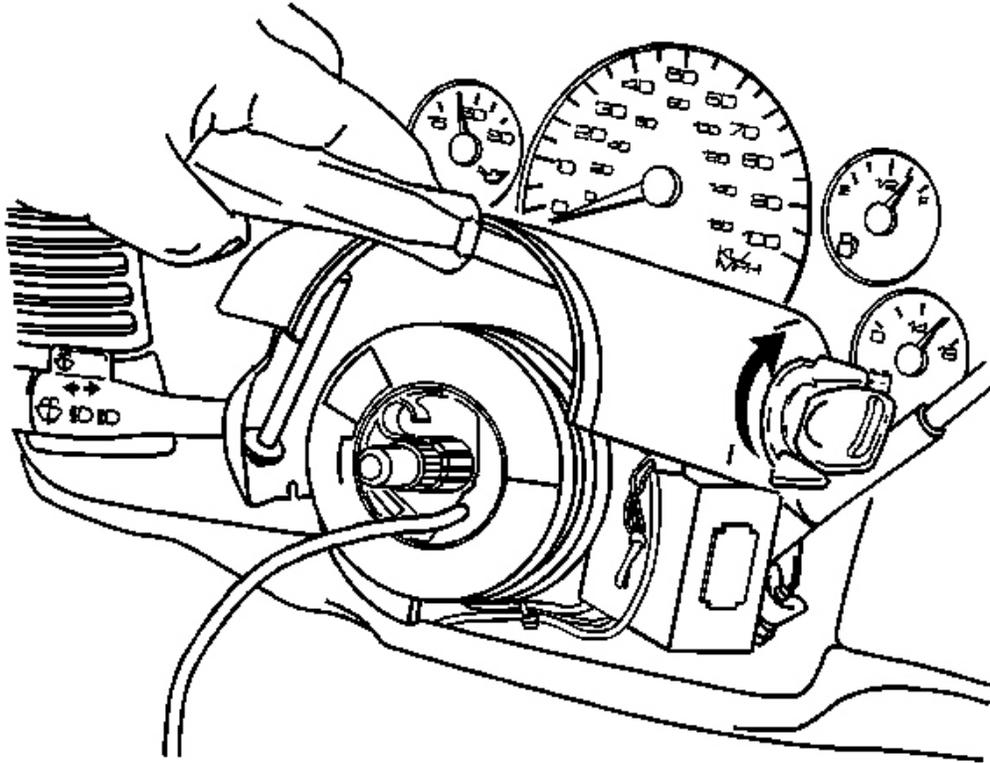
View Of Upper Steering Column Trim Cover & Screws
